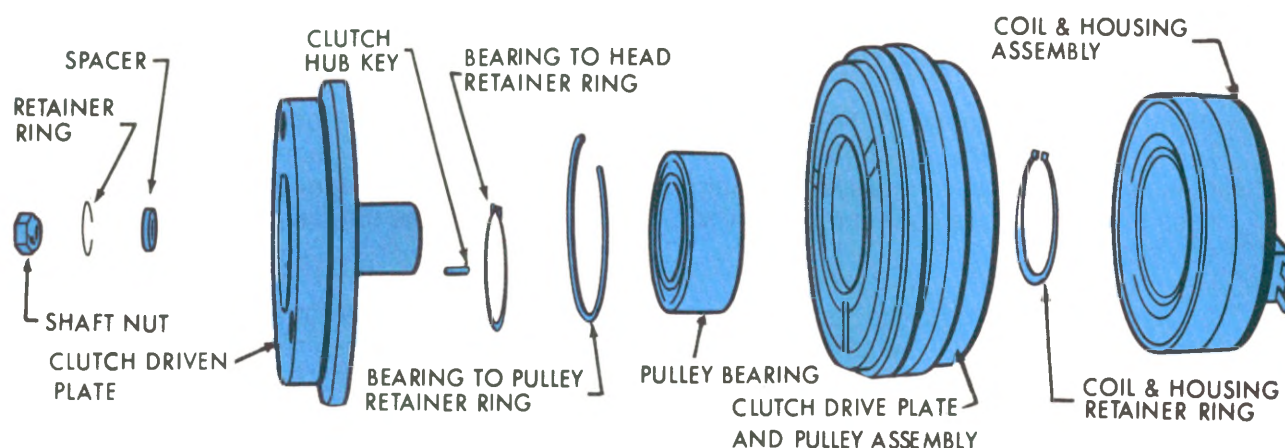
GM 6 Cylinder Compressor Clutch and Pulley Assembly
